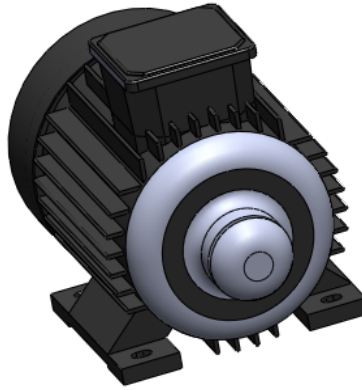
CAD drawing of Electric Motor E.M.Z
